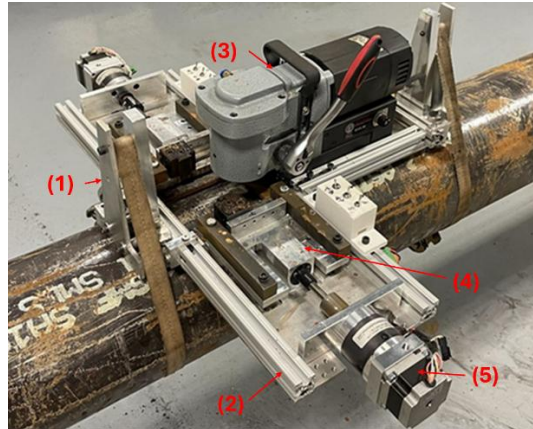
Prototype BTM: Pipe Feet (1), Frame (2), Milling Assembly (3), Drive Plate (4), Drive Motor (5)
